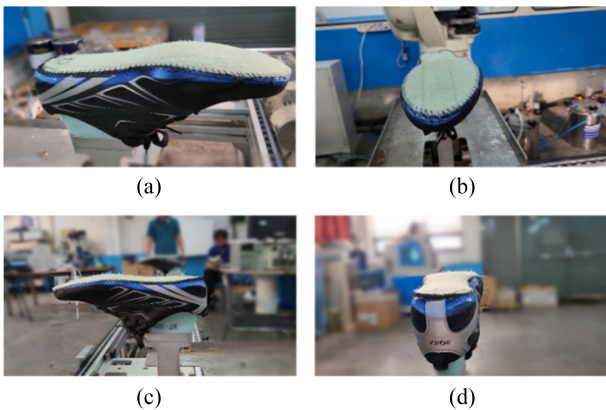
Result of the experiment (a): right side view, (b): front view, (c) left side view, (d) rear view
